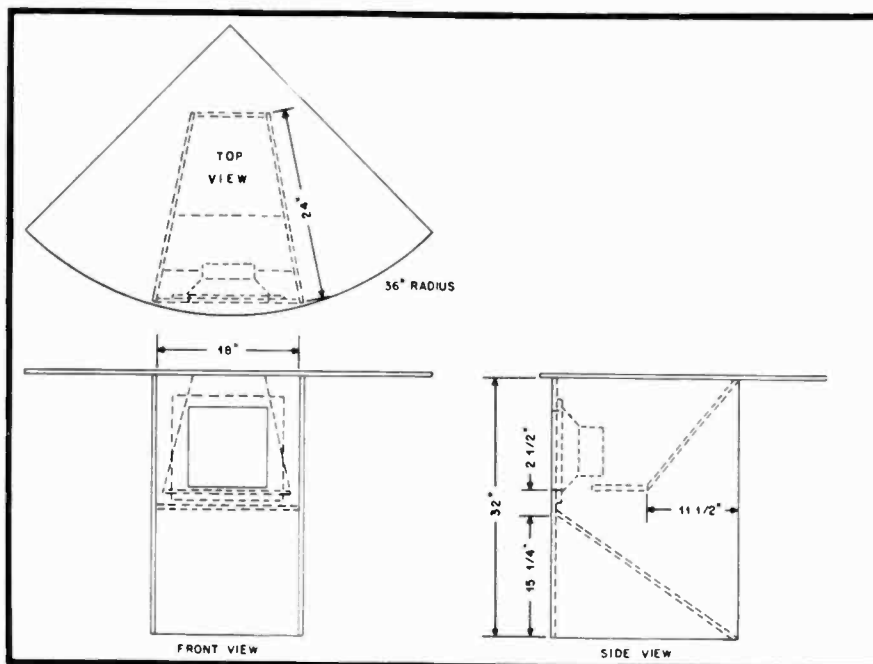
These three views show the general makeup and major dimensions of the enclosure. Dimension details can be changed to suit other speakers.
